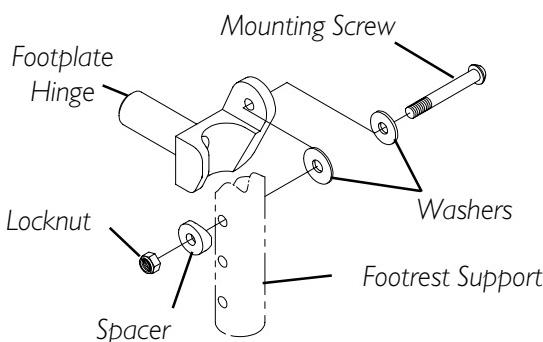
INSTALLING ADJUSTABLE ANGLE FLIP-UP FOOTPLATE HINGE
